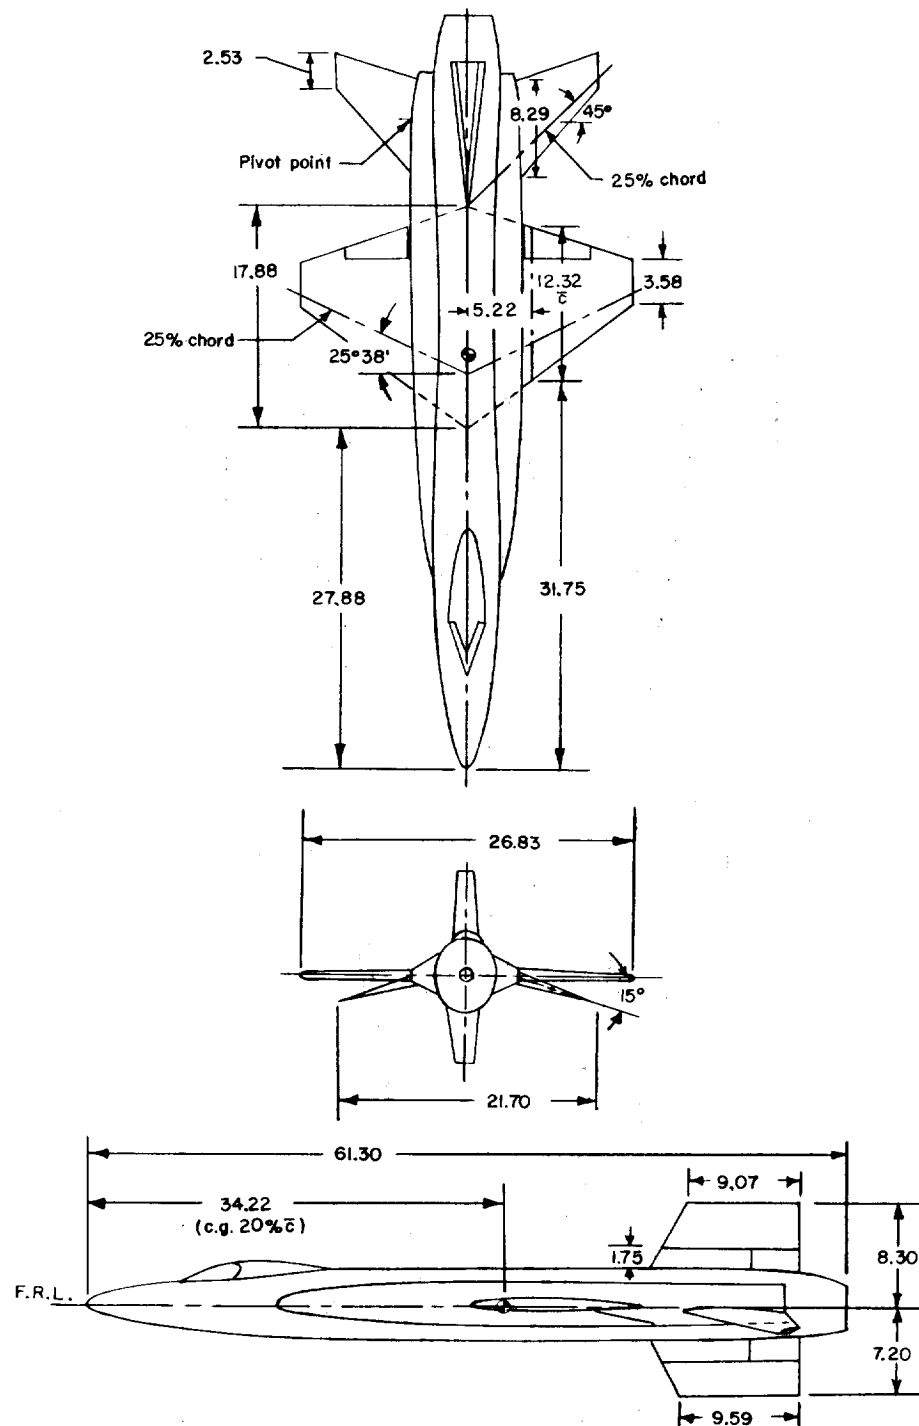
Three-view drawing of the model. (All dimensions are in inches.)
